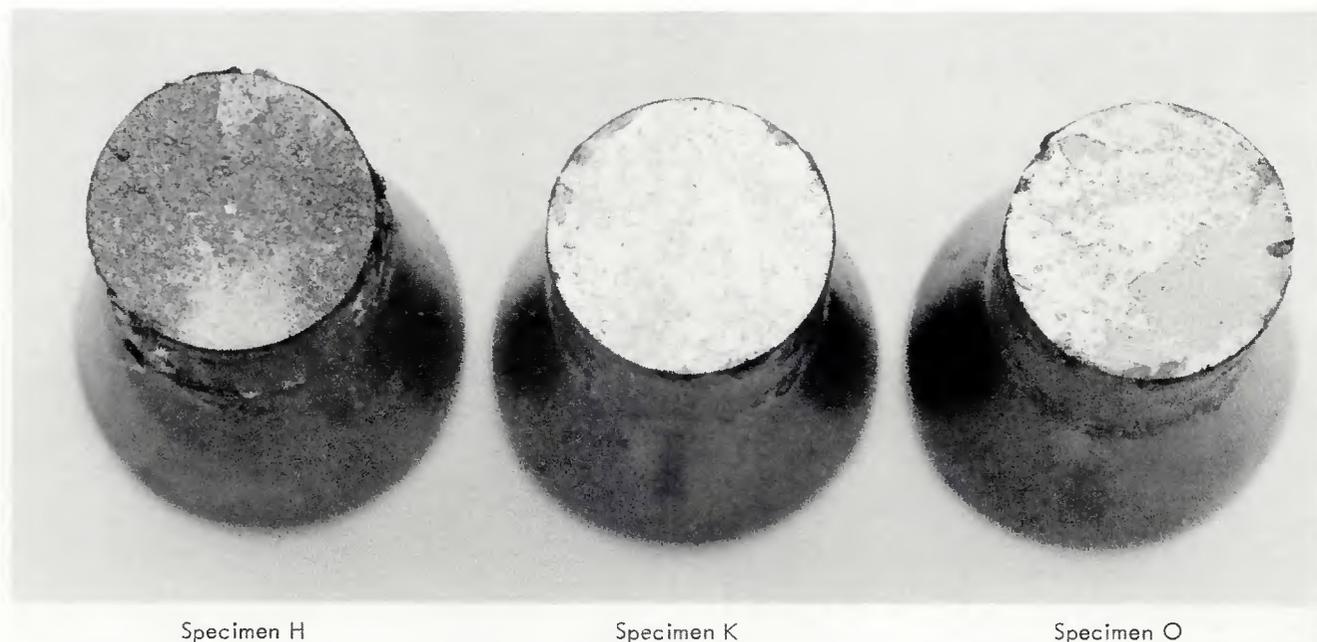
Fracture surfaces of brazed joints. Specimen H: strength, 30,900 psi; Specimen K: strength, 18,700 psi; Specimen O: strength, 7000 psi.
